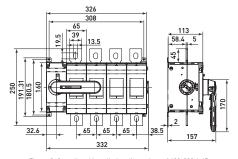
Overall and installation dimensions of 630-800 A 4P switch disconnectors
